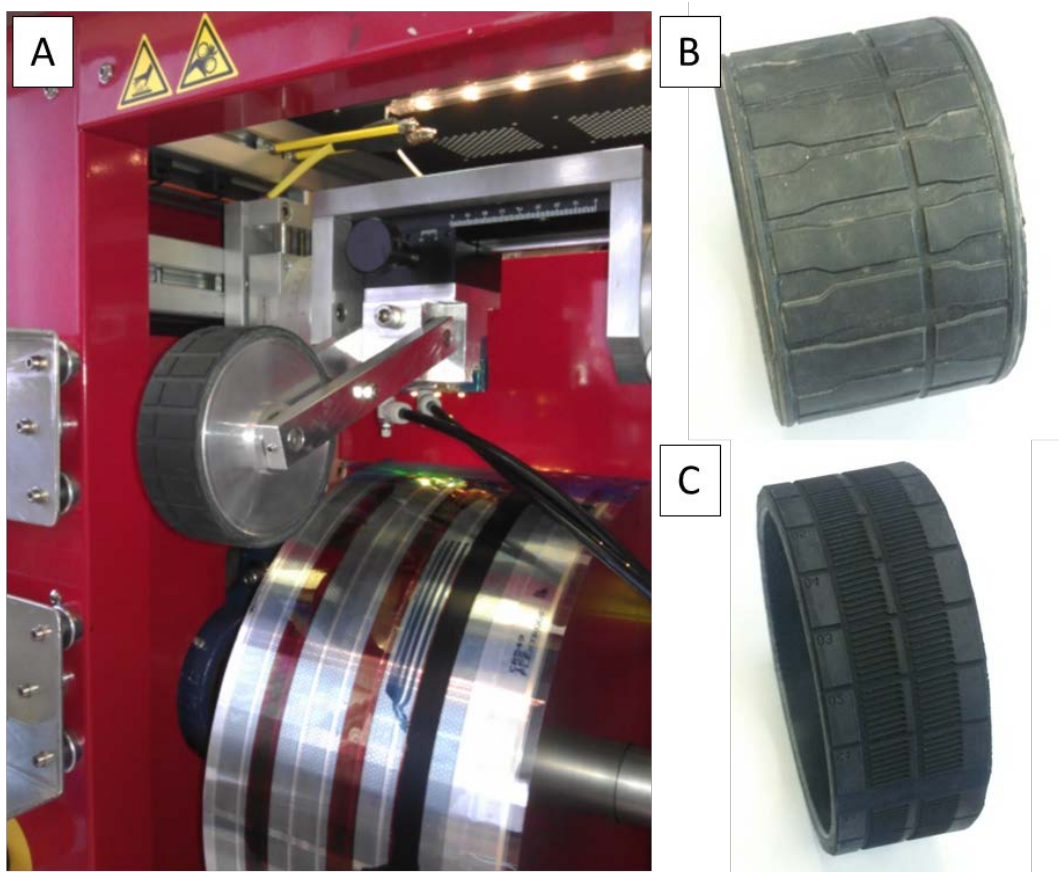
Flexographic rollers for printing the top electrode. Currently the ink used with these rollers is the silver particle ink PV410. A) Flexographic printhead mounted on the MRC machine. This version has a 30 mm flexoroller and a pneumatic piston to apply pressure against the printing surface. B) Shows a roller for the manufacture of 1 cm² cells compatible with the SameSUN system. C) A grid electrode for creating a series connected two cell module, with a 5 degree slanted finger electrode.
